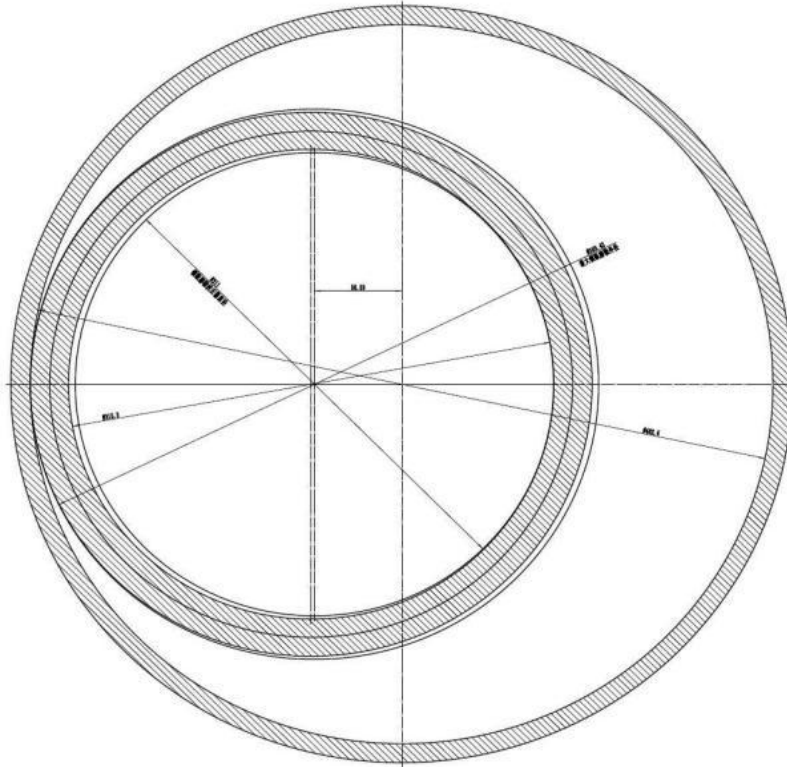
68 lb 13-3/8 " Casing under 106.5 lb 20 " Riser
